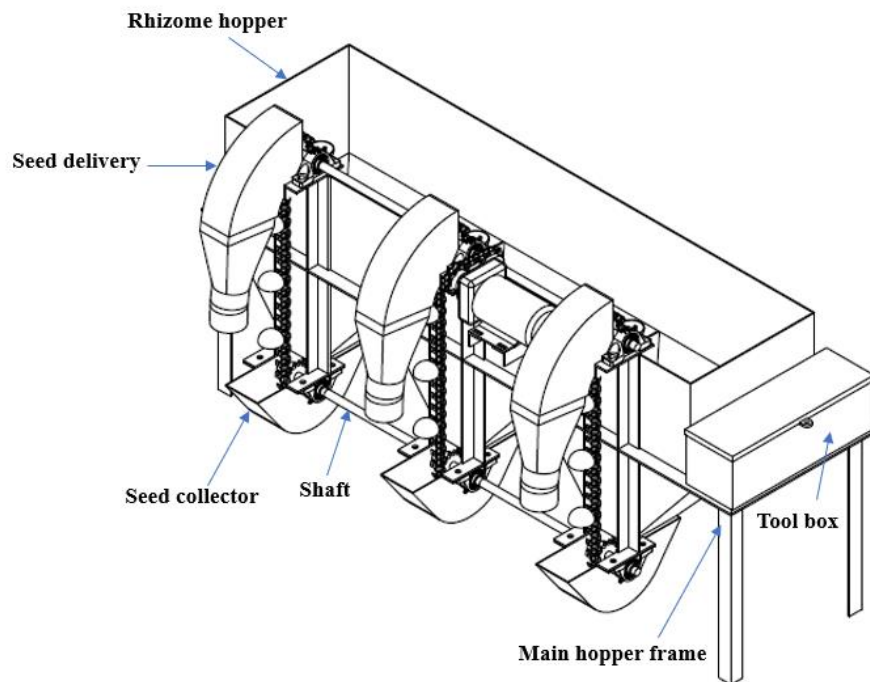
Schematic view of the main hopper, seed metering, seed delivery tube, seed collector, frame, tool box and chain with cups
